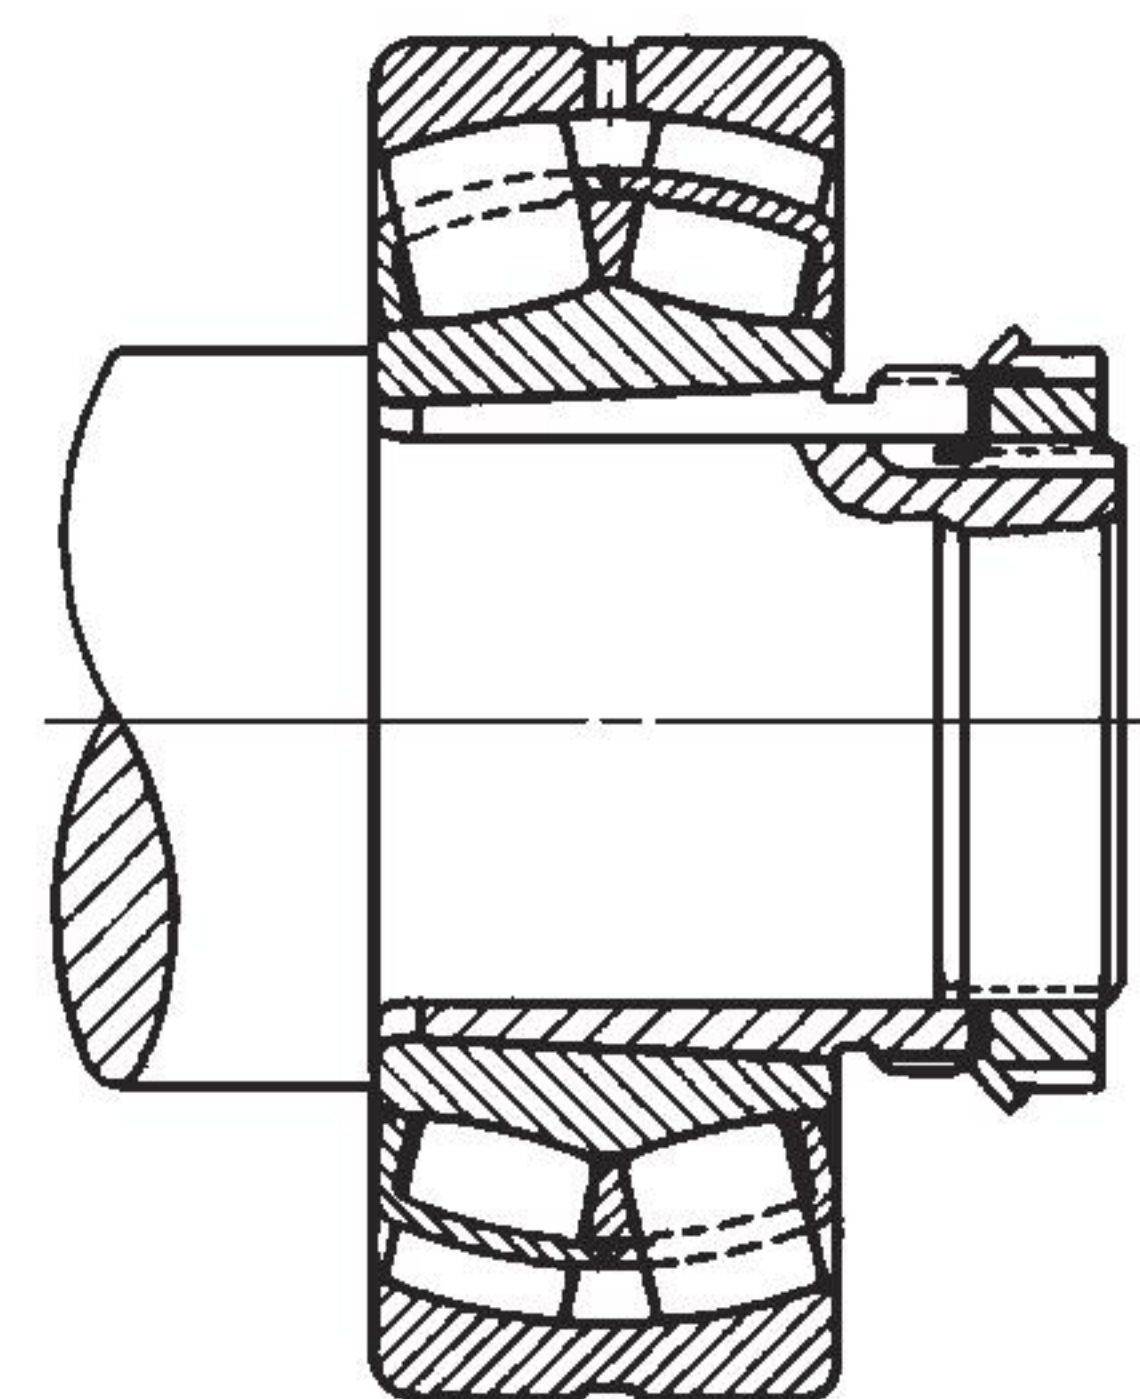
Mounting of a spherical roller bearing with removable type of sleeve.
